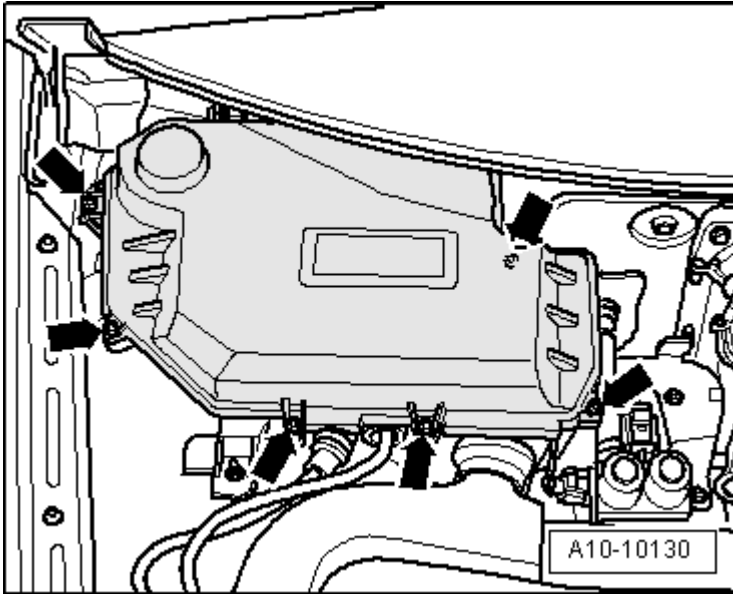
Removing Bolts And Cover For E-Box At Right In Engine Compartment
